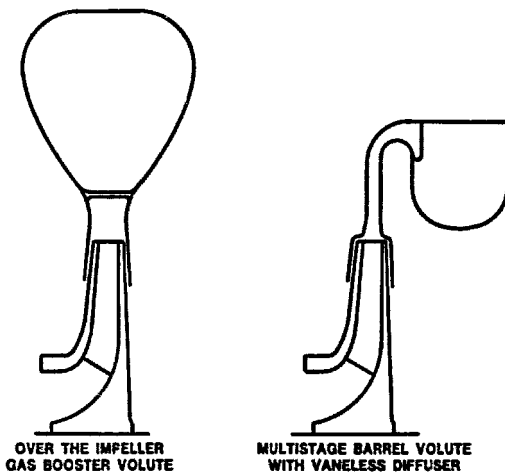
Discharge volutes: over-the-impeller and spillover types. (*Dresser-Rand Company, Olean, N.Y.*)
